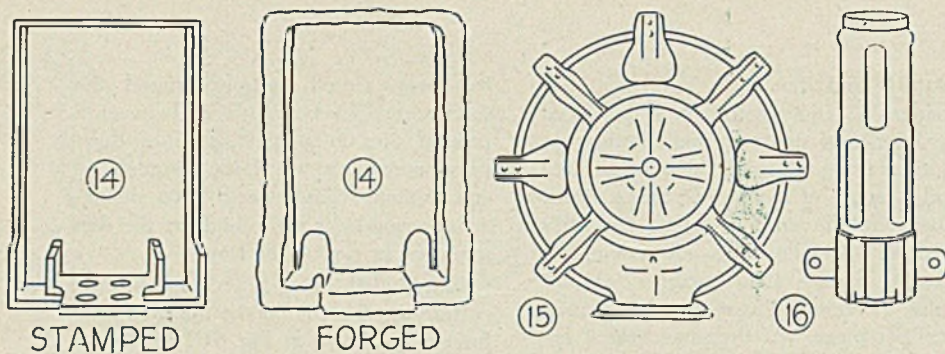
Original forged trigger cover plate required 29 critical machine tool operations. Made as a composite stamping, these are replaced by 7 noncritical blanking, forming and welding operations
